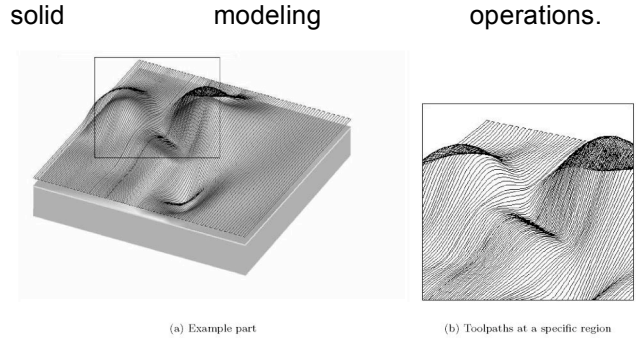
EXAMPLE PART AND TOOL PATHS.
